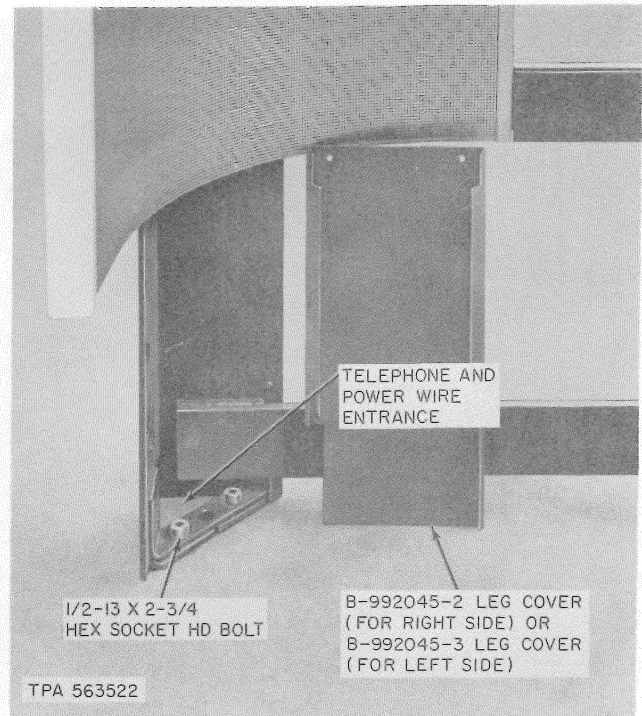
List 14 Leg Assembly Bolted to Mounting Surface
